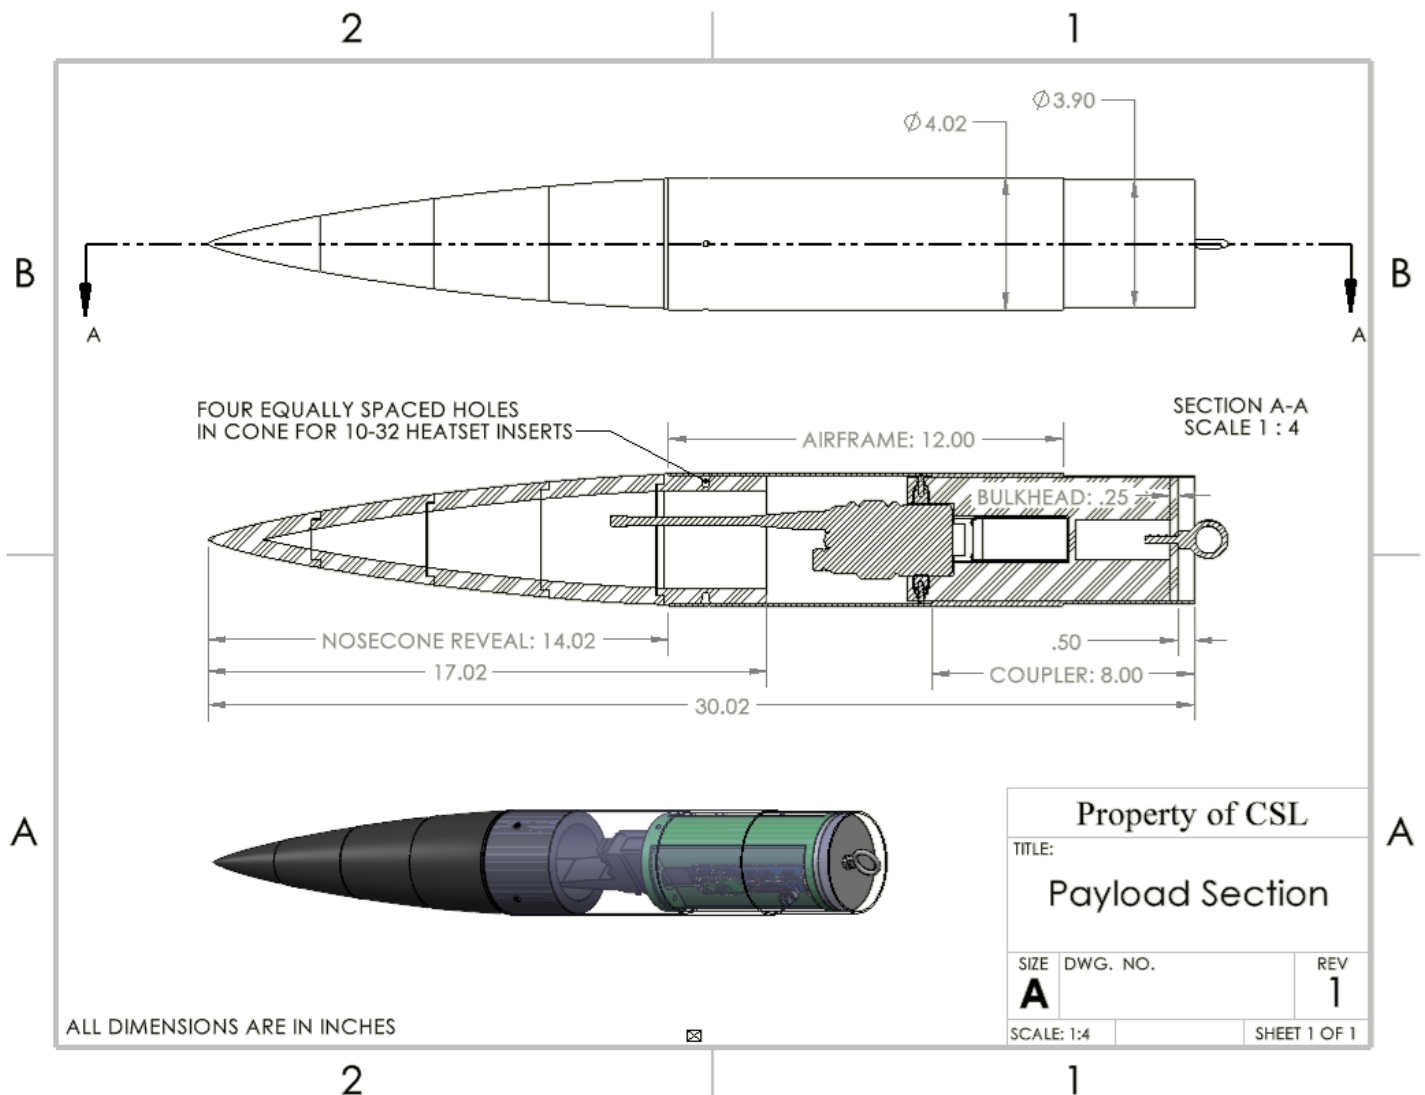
Dimensioned CAD schematic of the payload section. Fasteners are removed for clarity.
